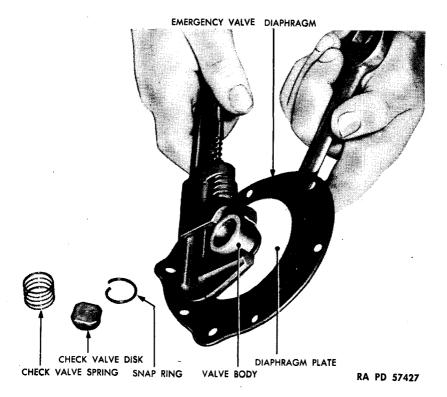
Disassembly of Check Valve Body and Diaphragm
